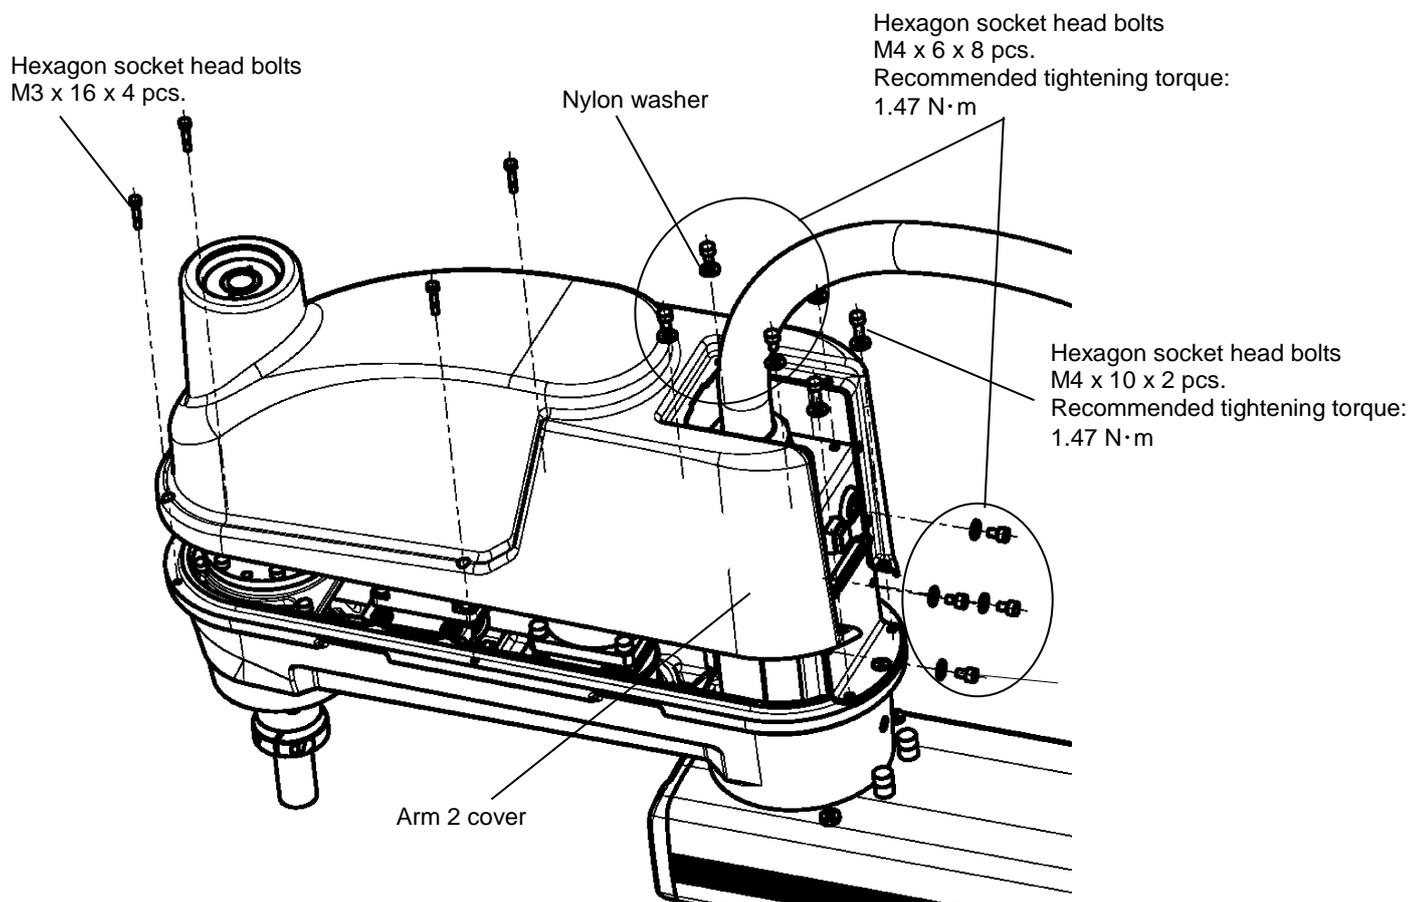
Removing the Arm 2 Cover (KHL-500, KHL-600 and KHL-700)
